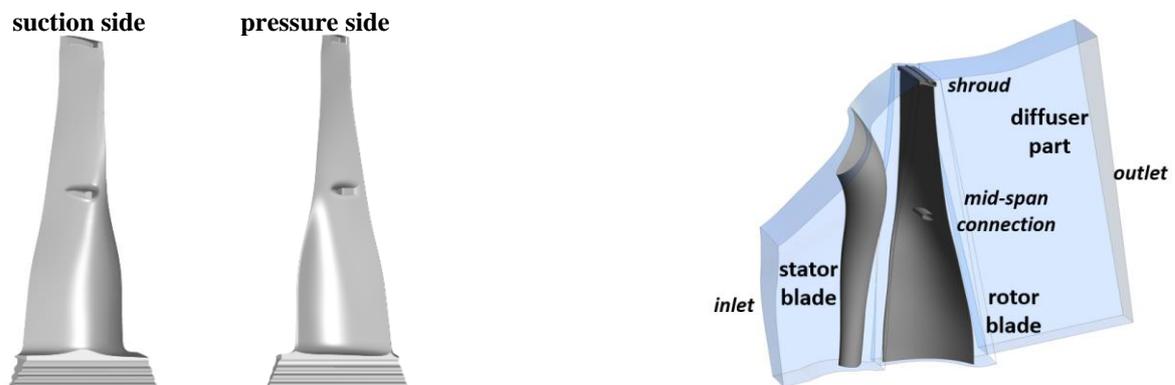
1100 mm long last stage rotor blade (left), CFD (right)
